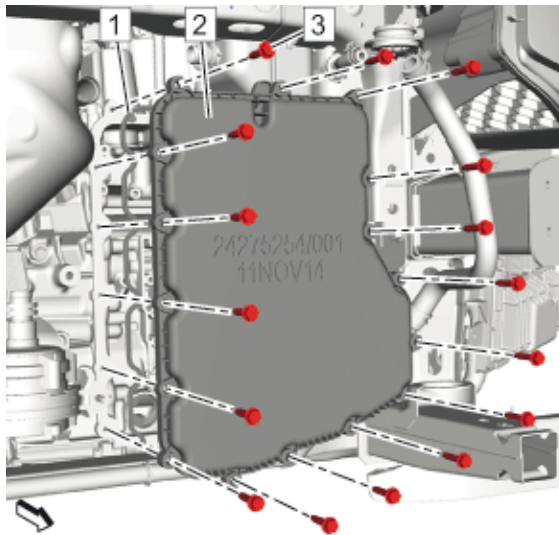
Control Valve Body Cover, Bolts And Gasket
